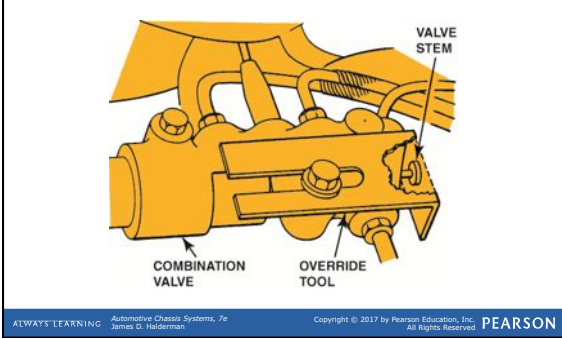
Pull-out-type metering valves being held out using a special override tool.
